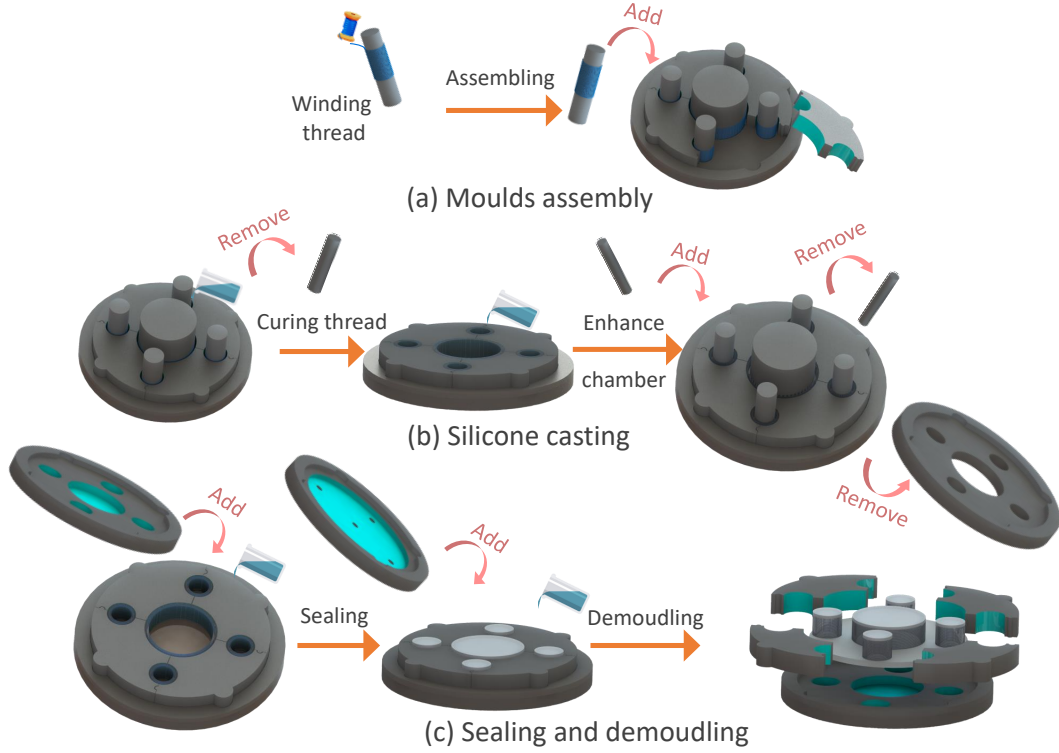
Diagram of fabrication of the feedback actuator:(a)→(b)→(c). (a) Moulds assembly: In-extensible thread is manually wound around the chamber moulds before assembling all parts of moulds. (b) Silicone casting: silicone compound (Ecoflex 0010, Smooth-on) is poured into the moulds. After the silicone chamber is cured, the chamber moulds are pulled out, and the threads remain in the chamber and embedded in the actuator. Smaller chamber moulds are inserted into the chamber and cast an enhanced layer of each chamber. (c) The actuators are sealed with stiffer silicone (Dragonskin 30A, Smooth-on), and the silicone pipes are connected with the reserved holes by silicone glue (Sil-poxy, Smooth-on). Then the demoulding of the components and finalising the actuator.
